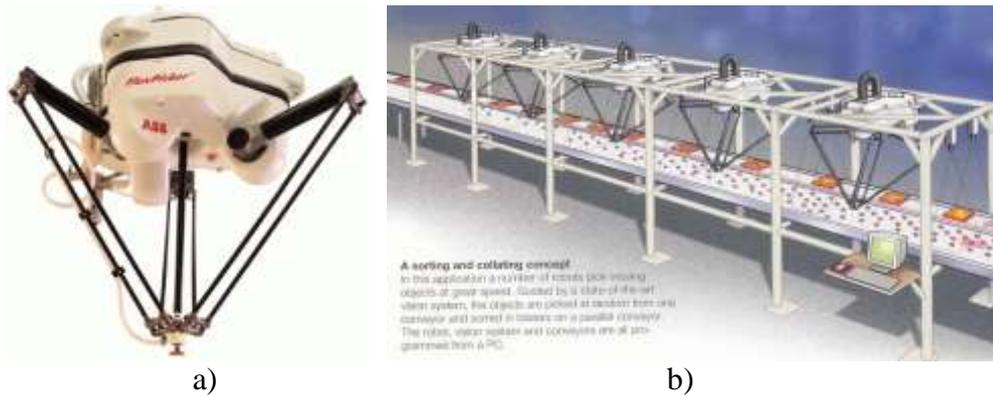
Delta parallel manipulator: a) the ABB commercialized version; b) industrial application for fast pick & place packaging
